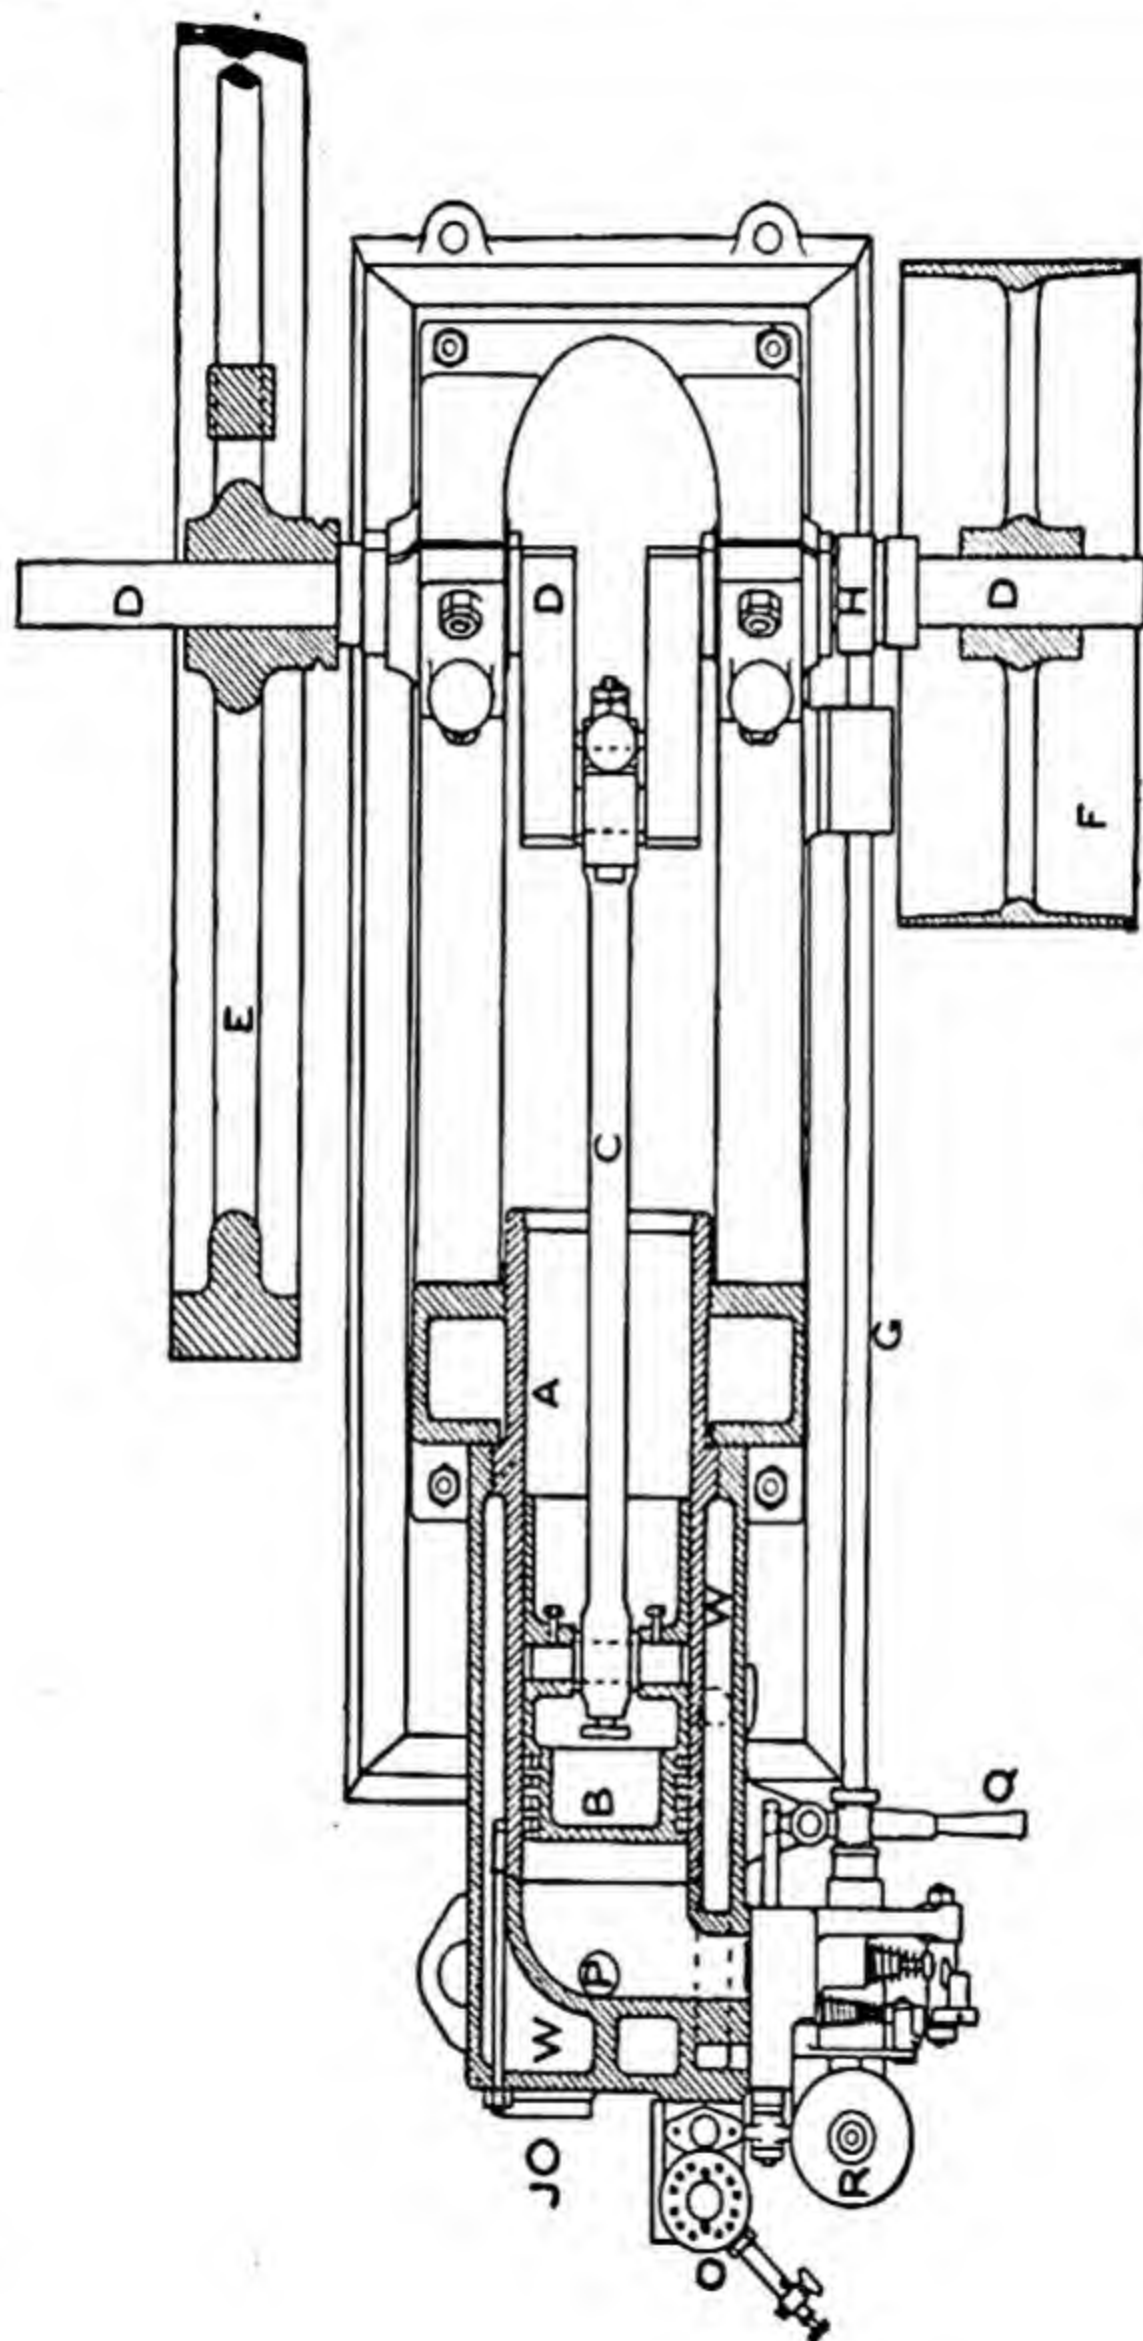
Sectional plan of 6½ B.H.P. Crossley gas engine.
